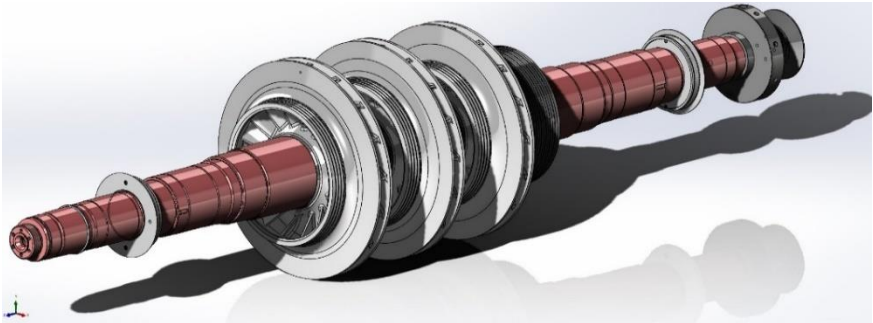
The 3D view of the compressor rotor, considered in this paper.
